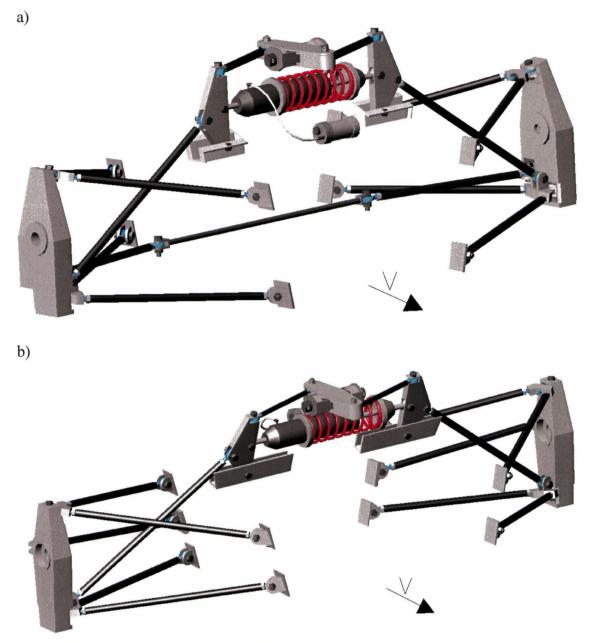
Suspension layout a) front suspension b) rear suspension
